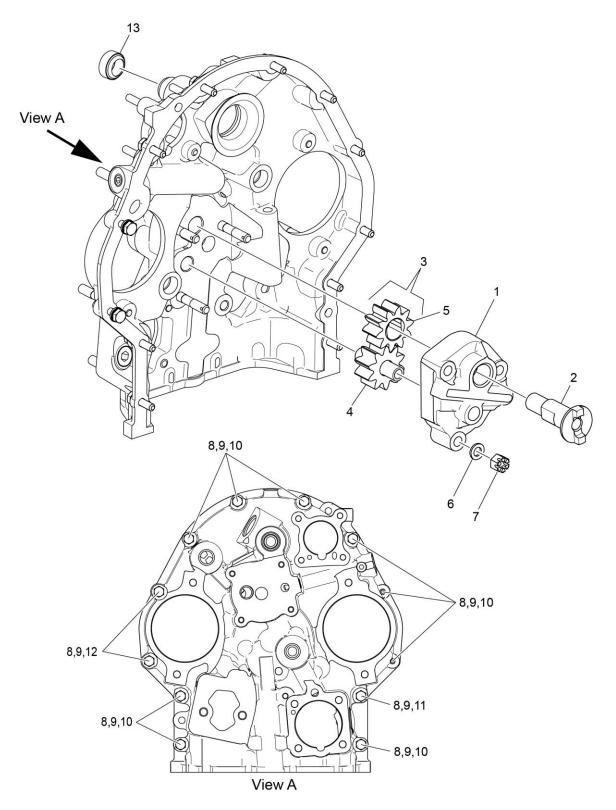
Oil Pump Assembly and Accessory Housing Attaching Parts
